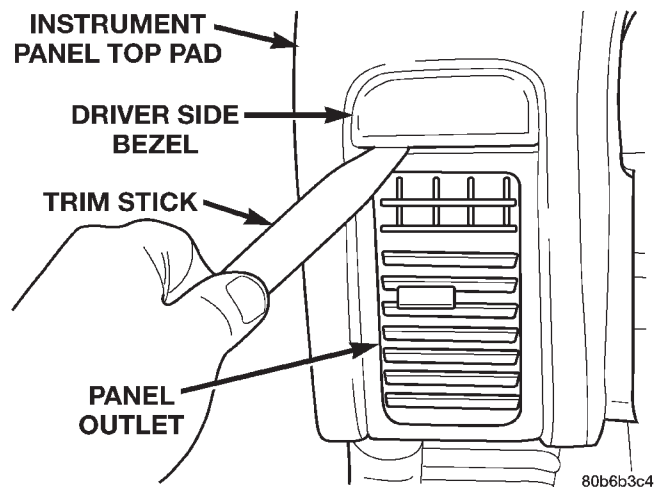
Instrument Panel Driver Side Bezel Remove/Install
